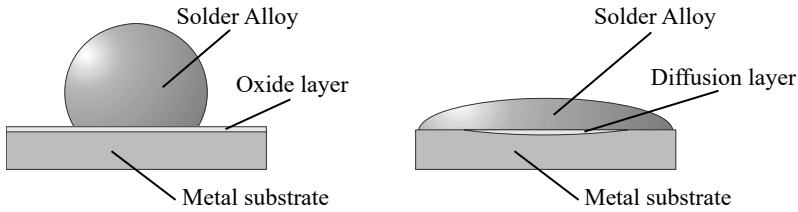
(Left) Liquid solder alloy on oxidized substrate. Solder alloy does not wet the surface. (Right) Liquid solder alloy on clean substrate. The solder alloy wets the surface and a diffusion layer is formed at the interface
